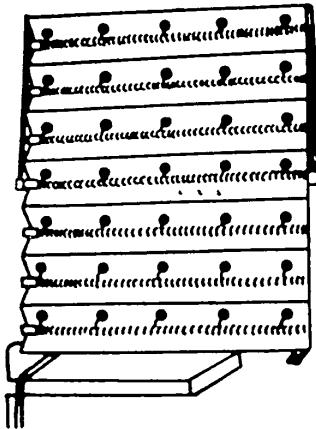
Interior View of the Device for Heating the Sheets with Nichrome Spiral Wire as Heating Elements
